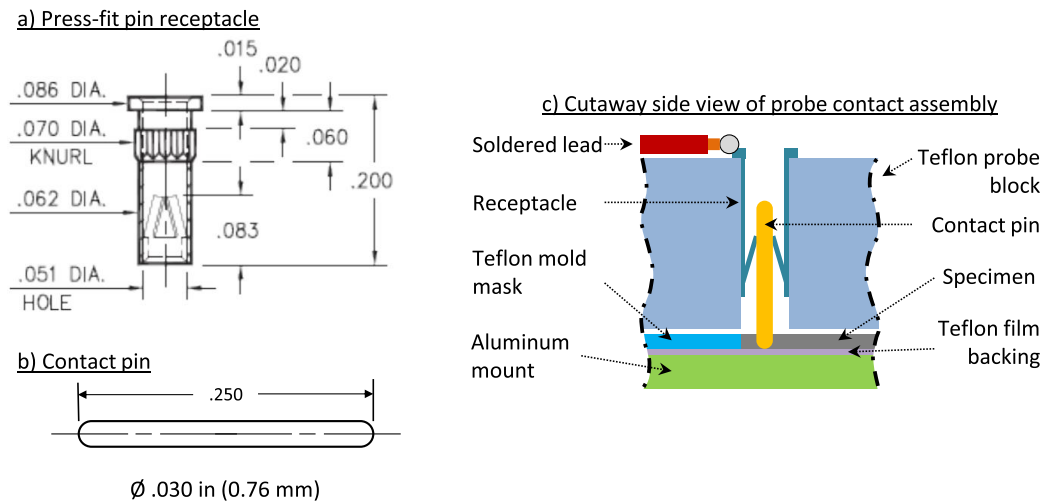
Components used in 4-wire probe. a) Press-fit pin receptacle, b) electrical contact pin, c) cut-away side-view of assembly of electrical contact components and teflon body and mold components. Receptacle schematic provided for public use by manufacturer.
